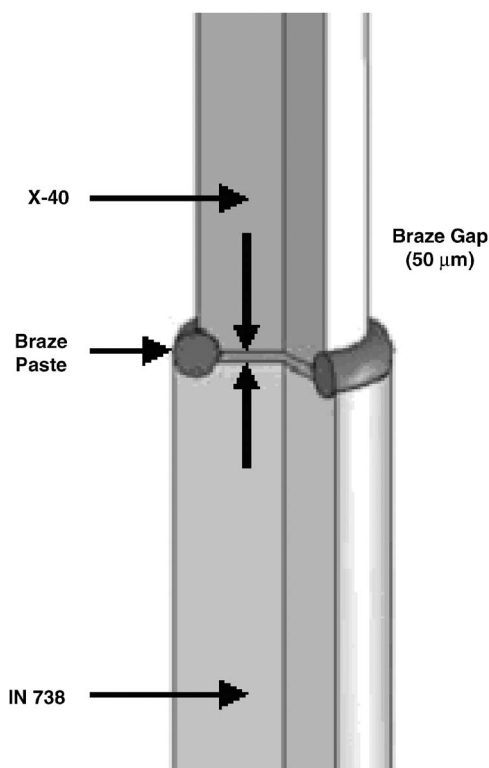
Narrow gap joint with controlled gap using tack weld
